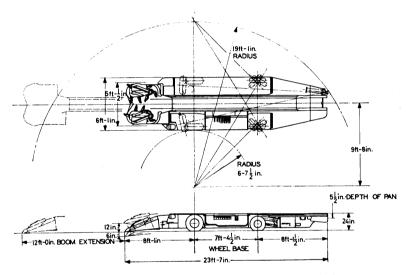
Conveyor-loader. (Jeffrey Manufacturing Co.)
